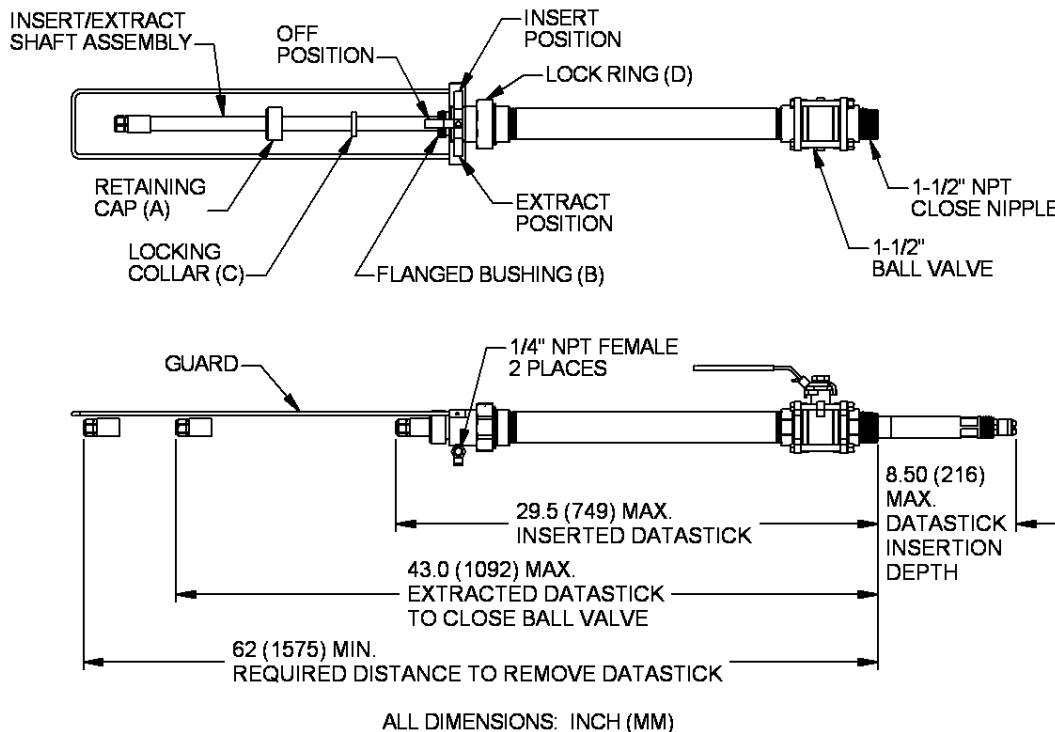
INSERTION MOUNTING HARDWARE (MH1112 shown)
